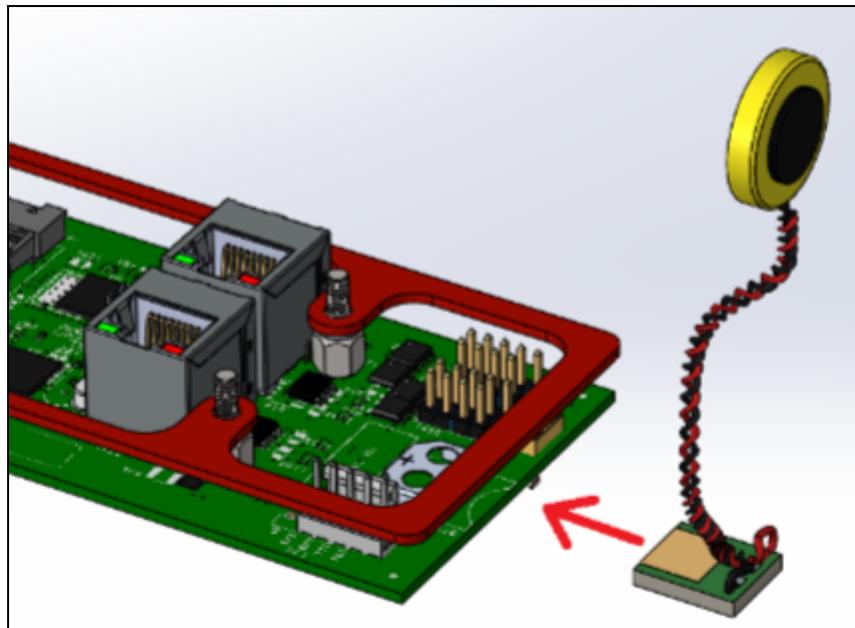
Check the Polarity Before Pushing PCB Into the Holder
